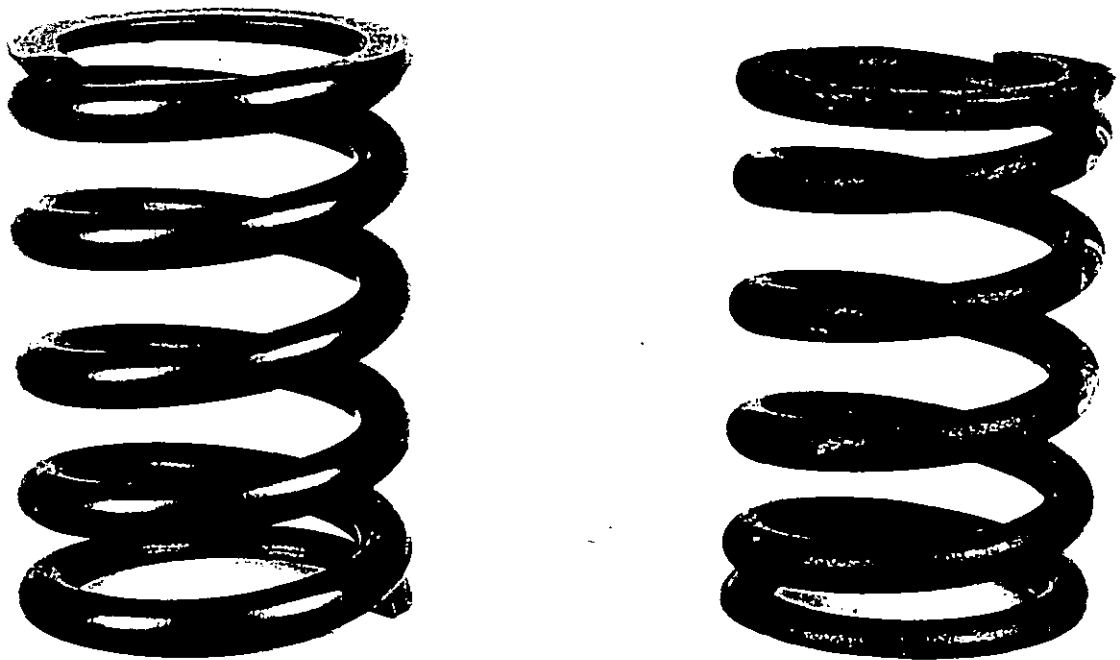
Two examples of conventional linear valve springs from 2 valve engines
